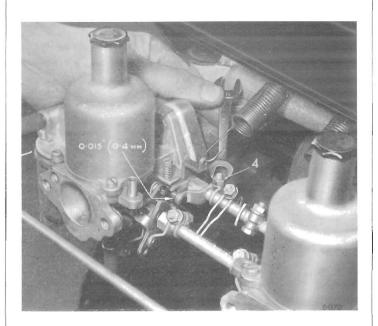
Adjusting throttle spindle clamps to give clearance of peg in fork
